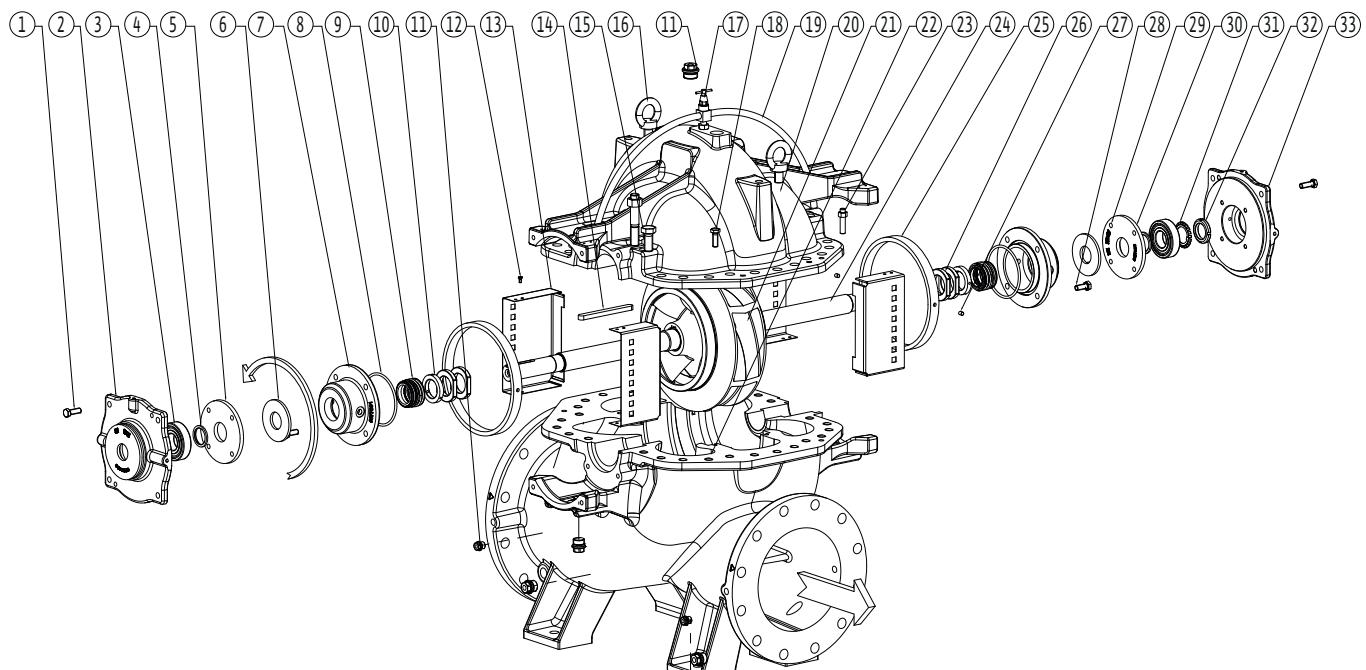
Exploded view of Atmos TERA-SCH hydraulic (mechanical seal version without sleeves)
